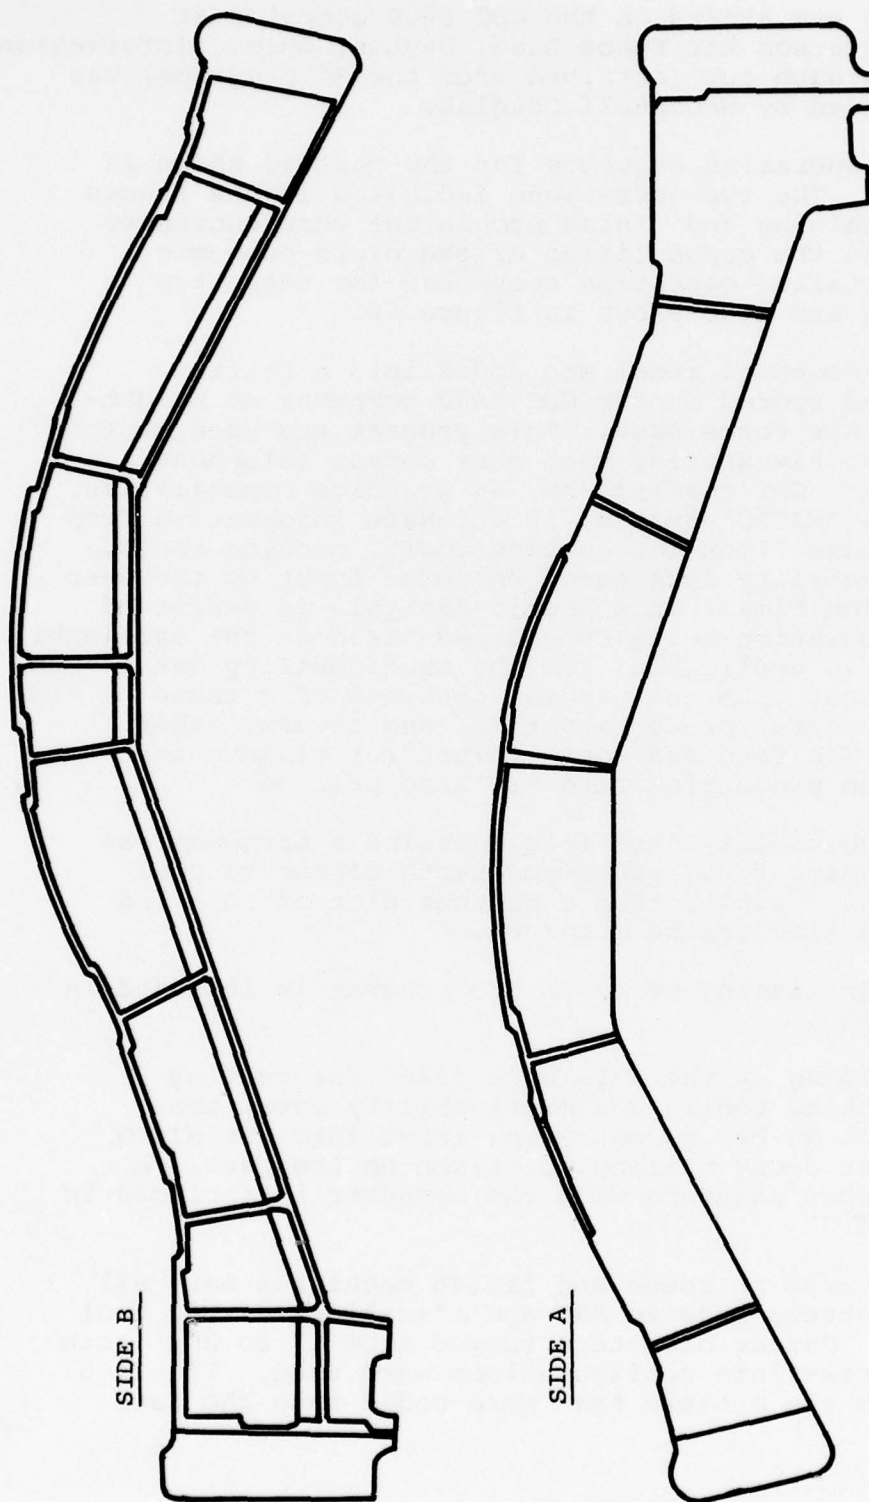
PART DRAWING FOR MACRO/MICRO ANALYSIS OF
